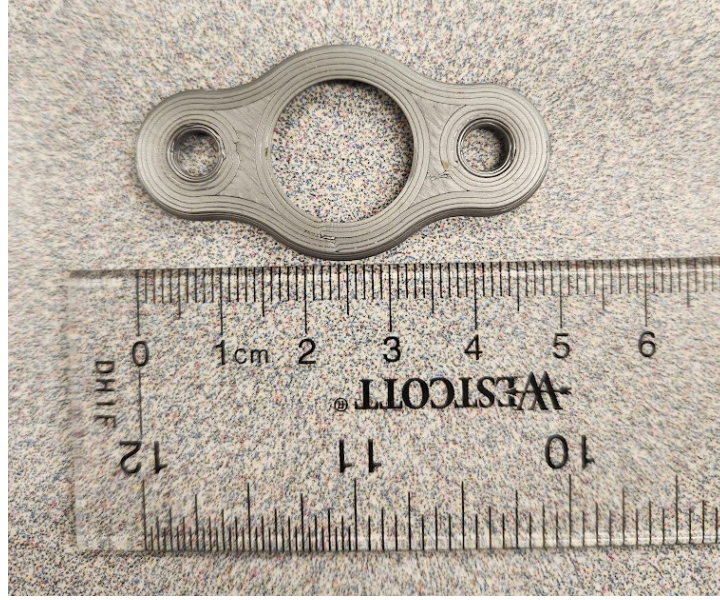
3D printed iButton mount used to attach iButtons to lath strips.
